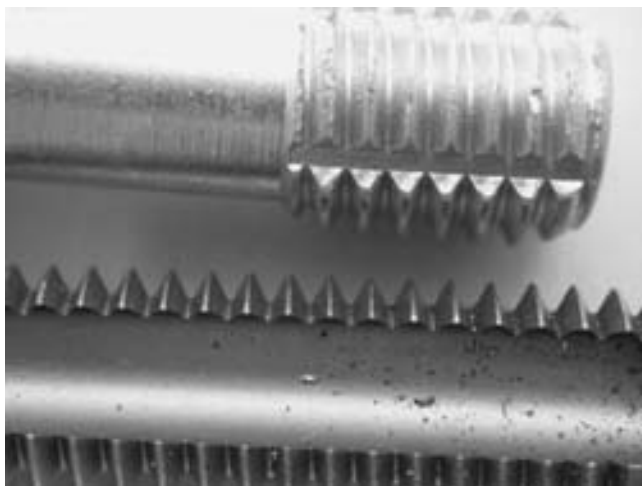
A thread chaser is shown at the top compared to a tap on the bottom. A thread chaser is used to clean threads without removing metal.
